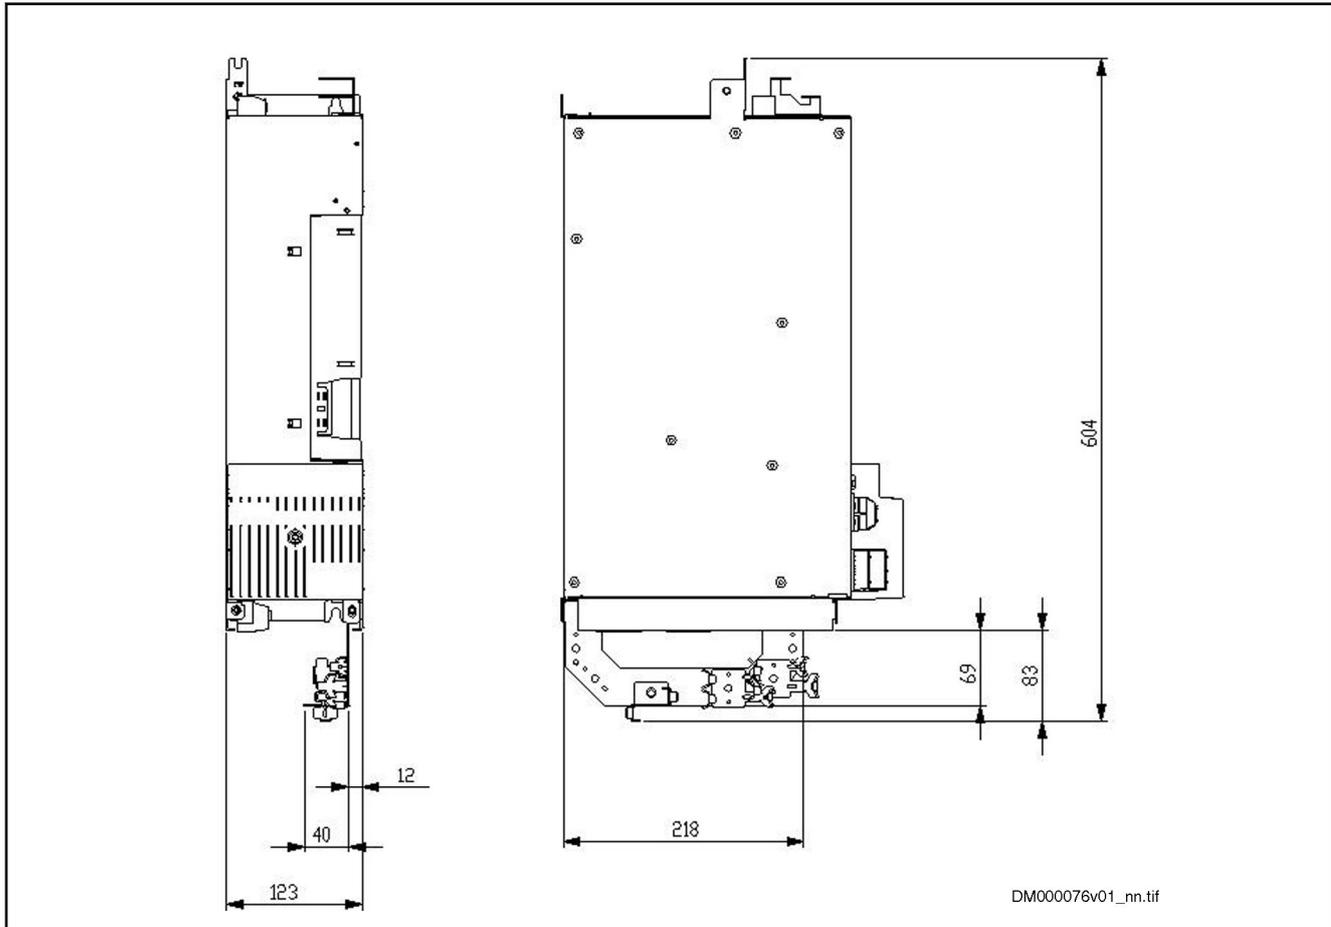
Dimensional drawing HCS03.1E-W0070
